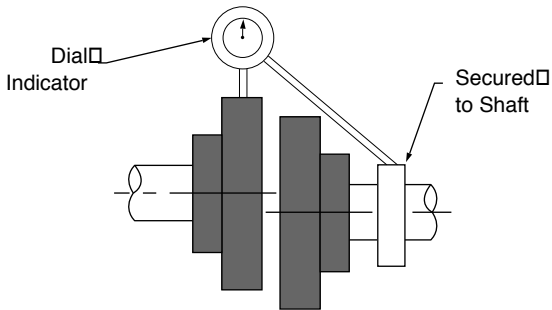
Dial Indicator Method of Checking Parallel Alignment
